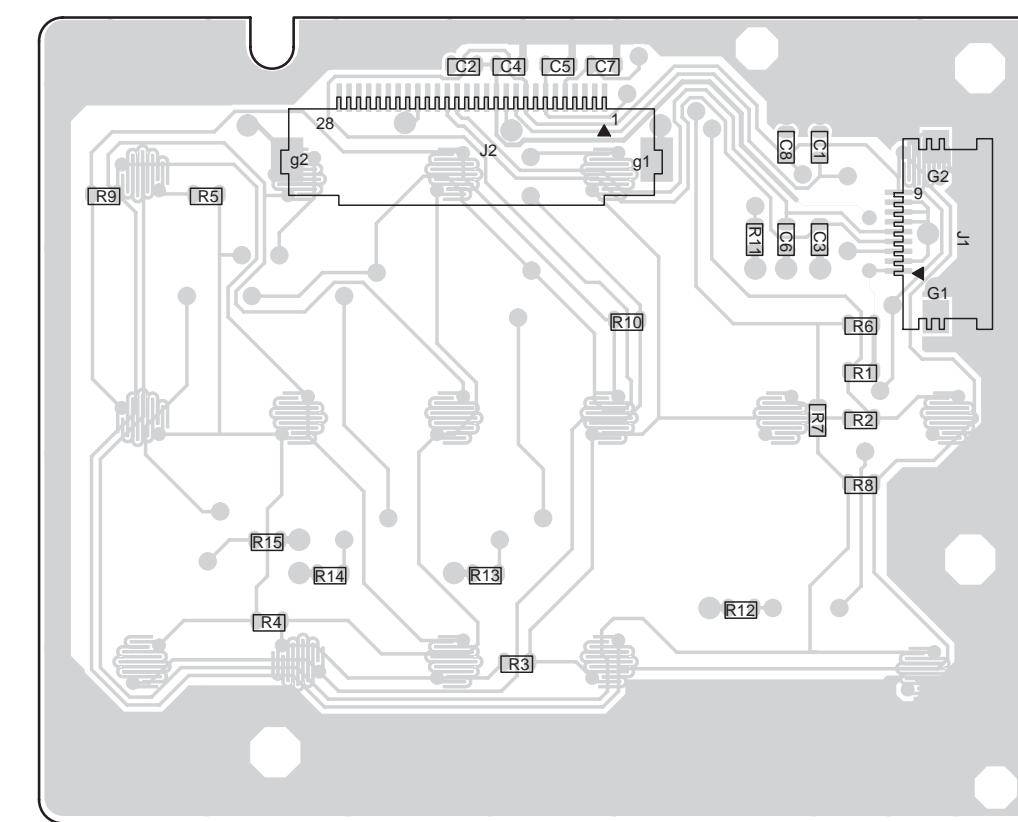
UHF (438-470 MHz) Board Component Side View
